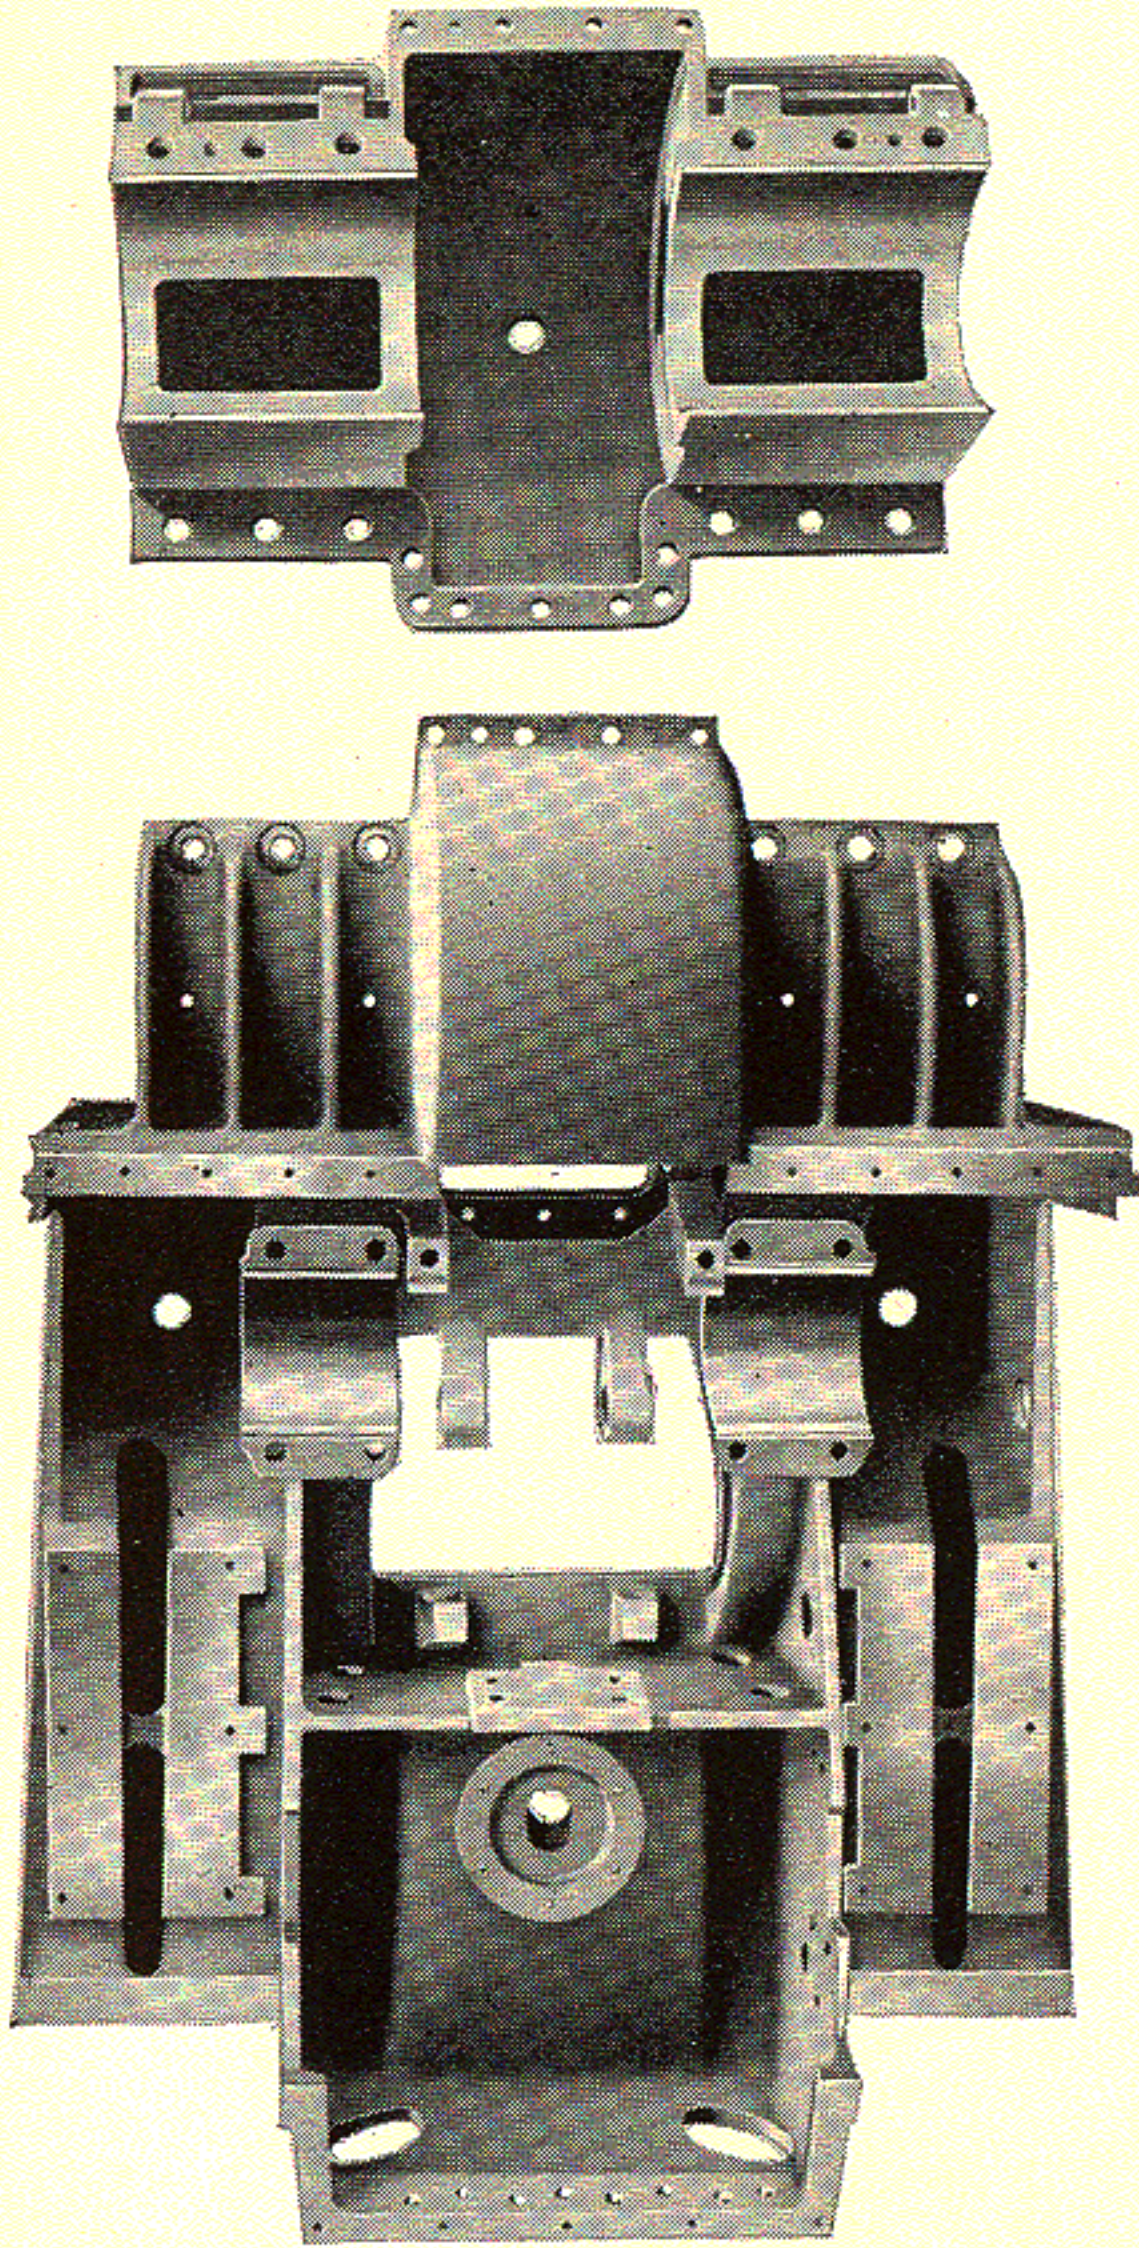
Type C-1 Booster Engine Bed and Axle Bearing Cap
